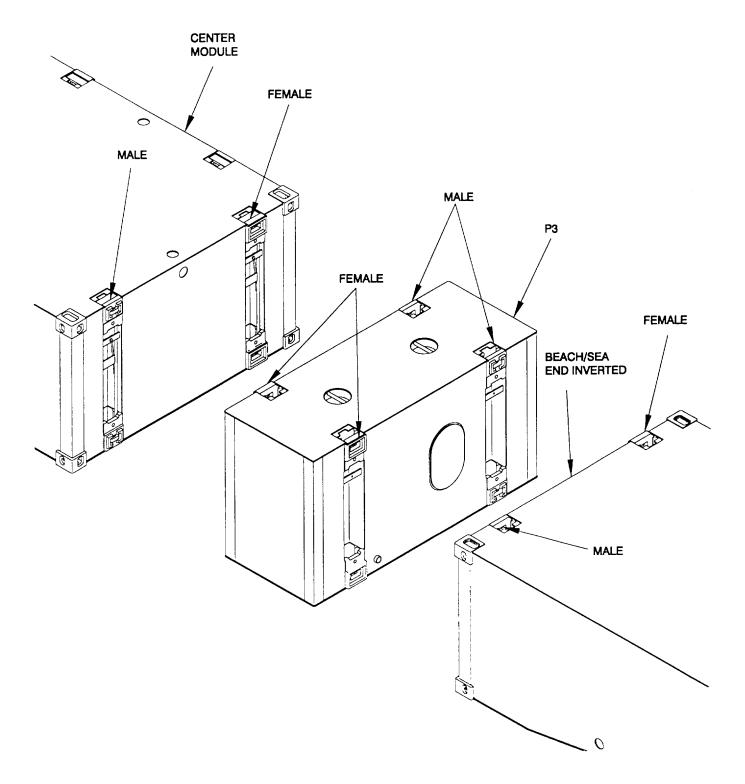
P-3 Adapter Assembly Connector Assembly.
